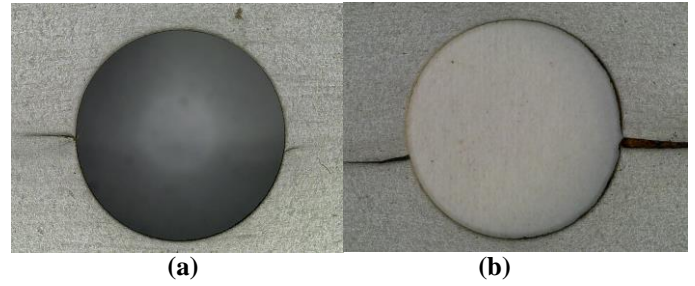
Photo of hole and crack after hole expansion test: (a) DP590 (b) DP980
